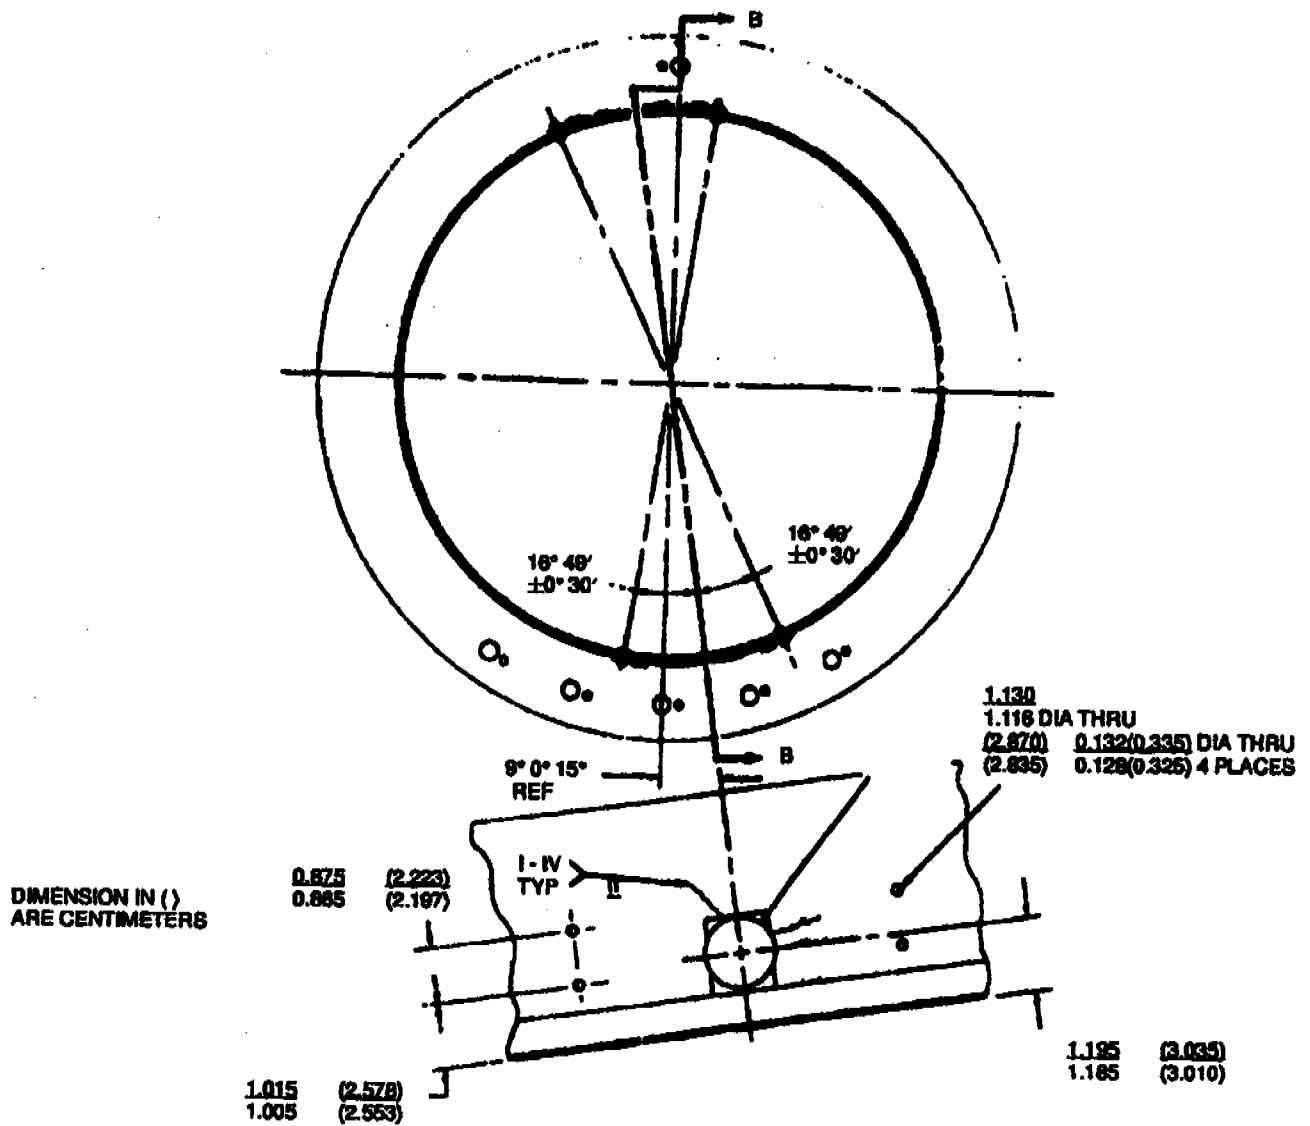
Fire Shield Weld Repairs and Hole Positioning for Lock Plate Replacement.
